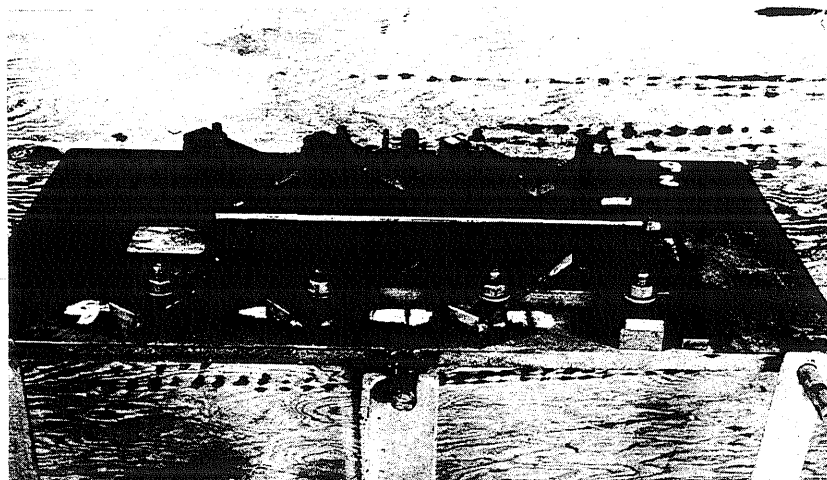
PLATE LAYOUT FOR STEEL Q, ASTM A-242, $\frac{3}{4}$ " THICK
